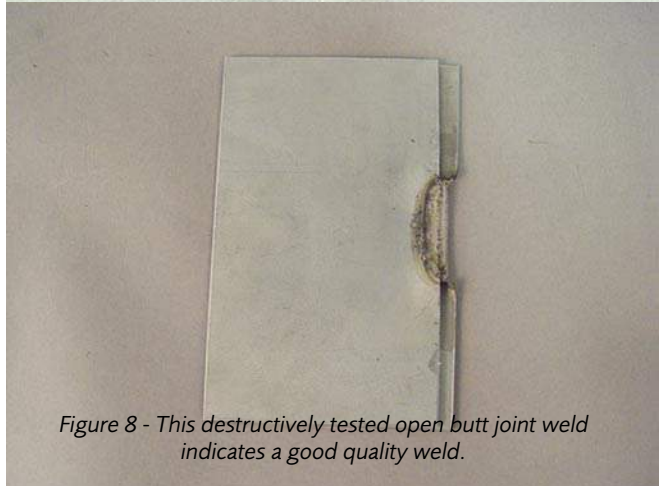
This destructively tested open butt joint weld indicates a good quality weld.
